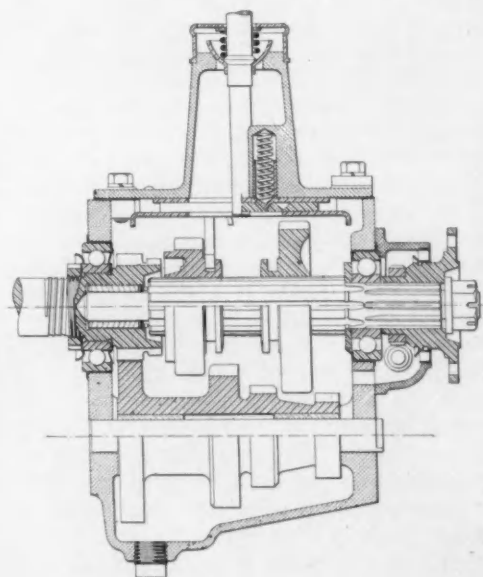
MUNCIE DESIGN THAT IS TYPICAL OF GENERAL MOTORS THREE-SPEED-GEARSET PRACTICE
